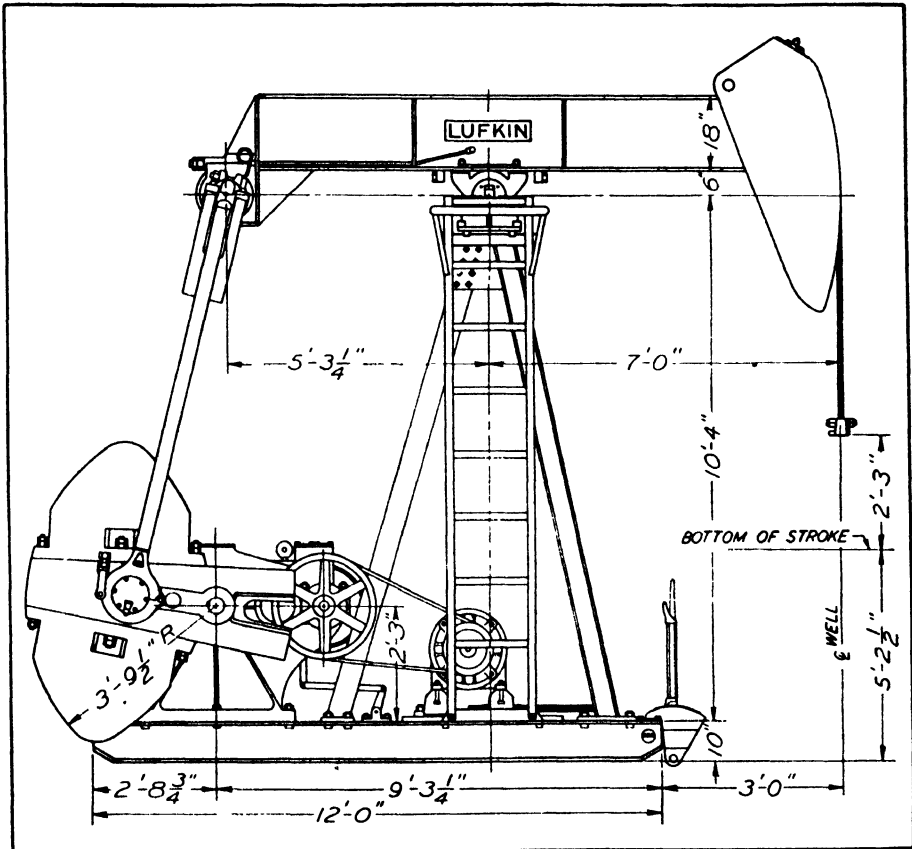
An outline assembly drawing. (Lufkin Foundry & Machine Co.)
